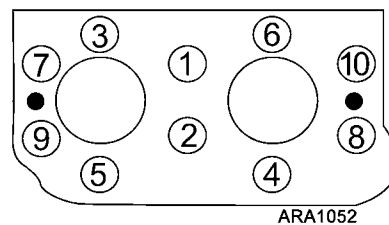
Cylinder Head Bolt Torque Sequence for Two Cylinder Engines
